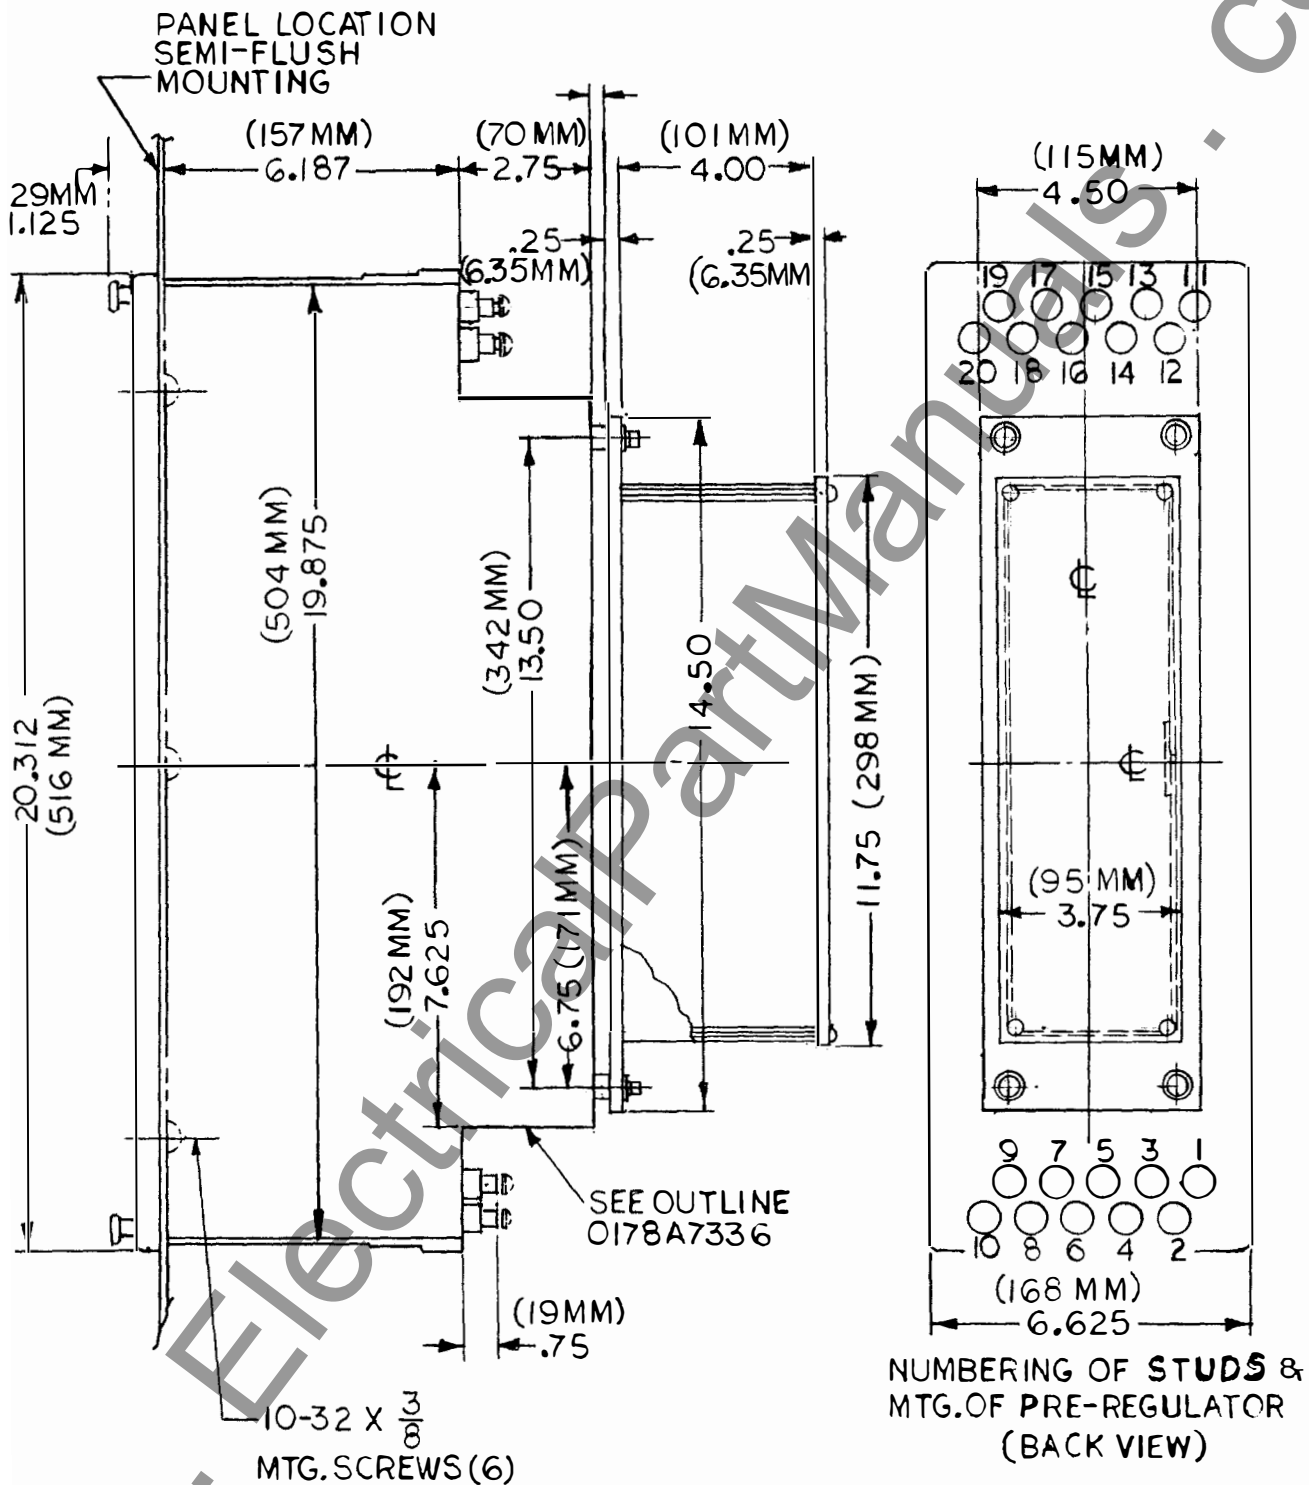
(0275A4339) Outline and Mounting Dimensions with Pre-Regulator
